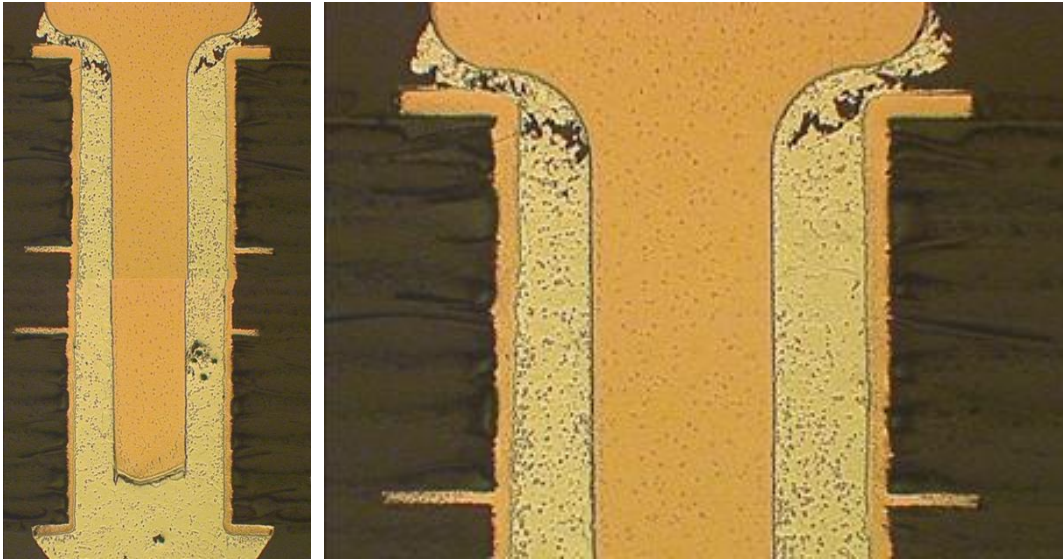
PDIP-20 Solder Joints, Board 43, Component U8, SN100C/NiPdAu, DNF
